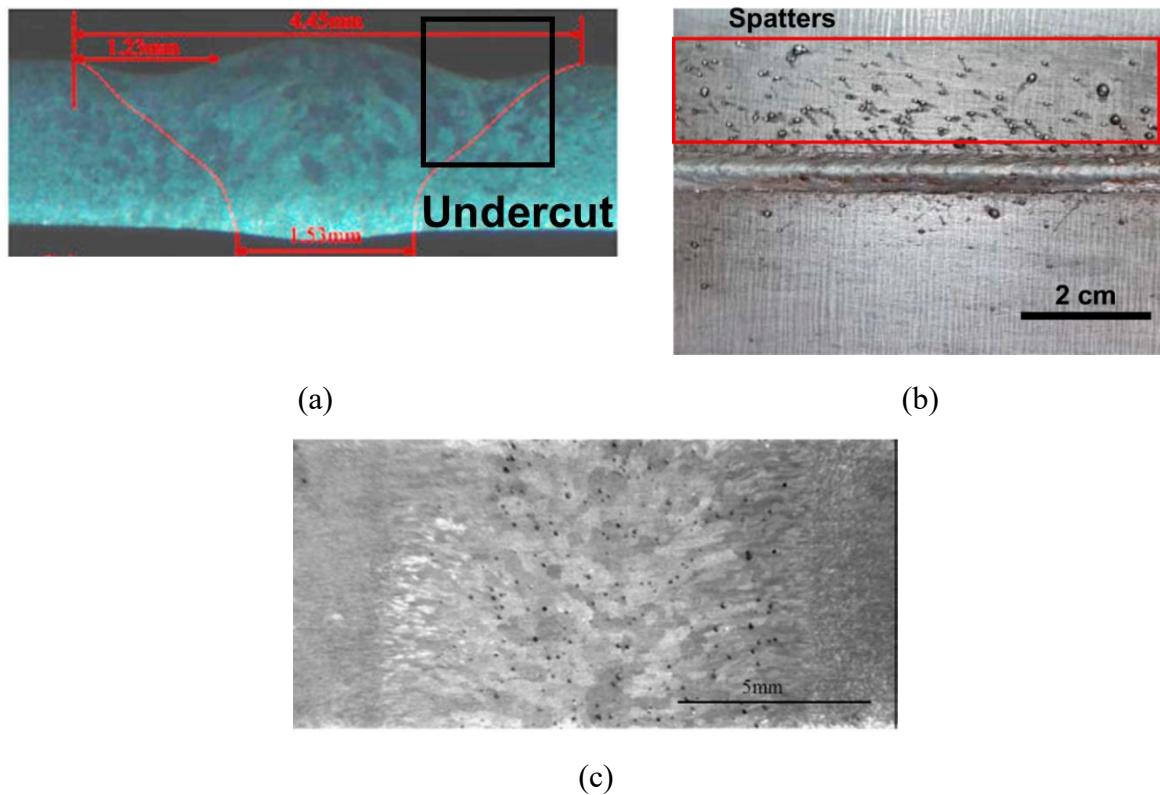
Defects observed during welding process including (a) cross-section of solidified weld bead with undercut [Men16], (b) weld with spatters in GMAW [Kan20] and (c) observation of top surface after solidification showing microporosities as black spots [Liu12].
